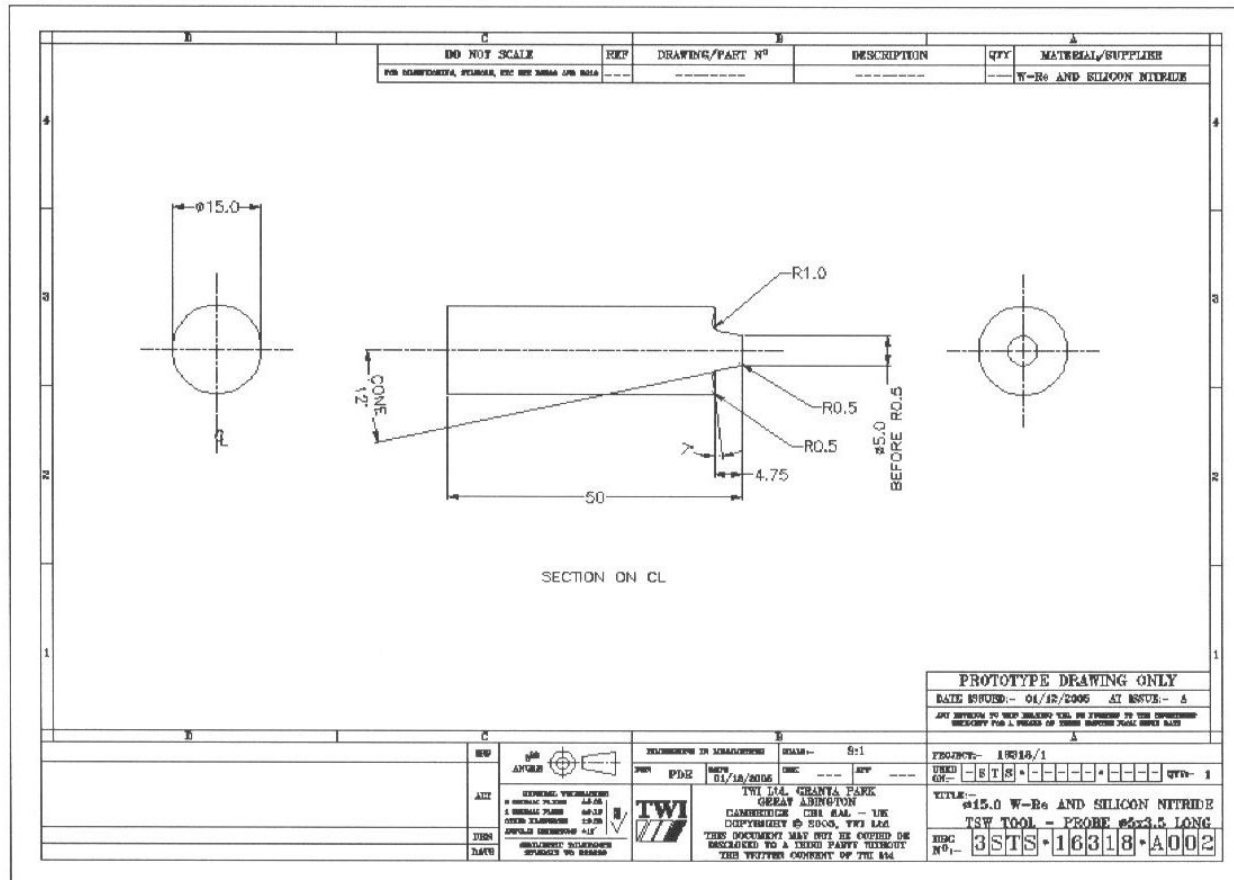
, Drawing of  $Si_3Ni_4$  and Re-W tools no. A002 and A003, TWI Drawing Reference 3SYF-16318-A002
